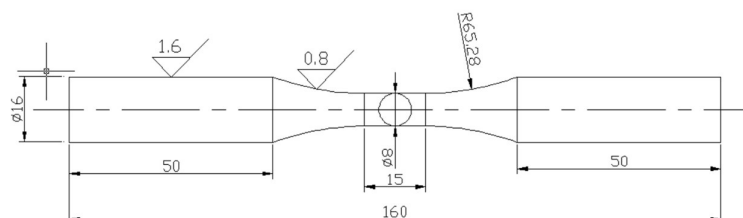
Shape and machining dimensions of uniaxial specimens (unit: mm).
